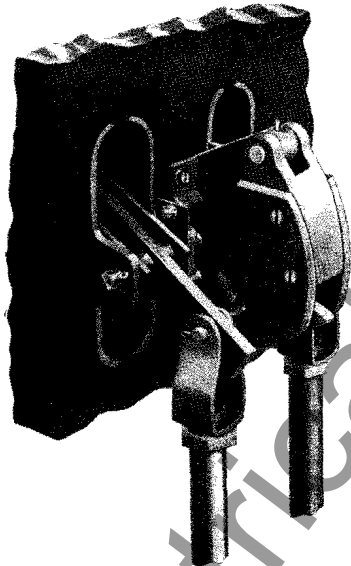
VIEW OF RUNNING SIDE WITH BOTH HANDLES OPEN
